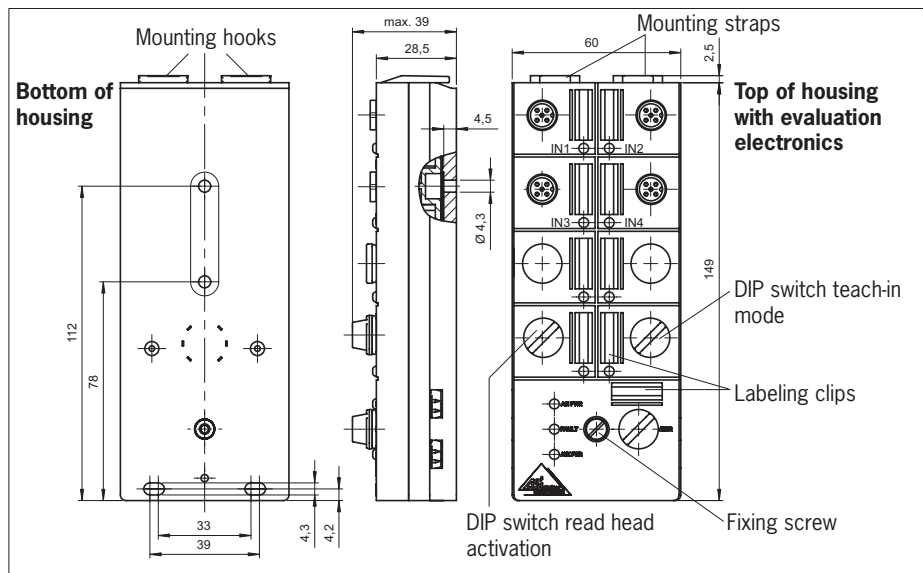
Dimension drawing for CES...AS1 (illustration shows version CES-A-F1B-04B-AS1)
